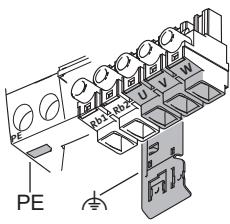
Removal of the contact screws for device sizes 1 ... 3 (on the supply side and on the motor side)
